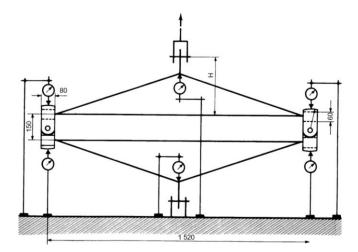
Connections between brake triangles to be tested and test stand for static tests – variant 1 [7]
